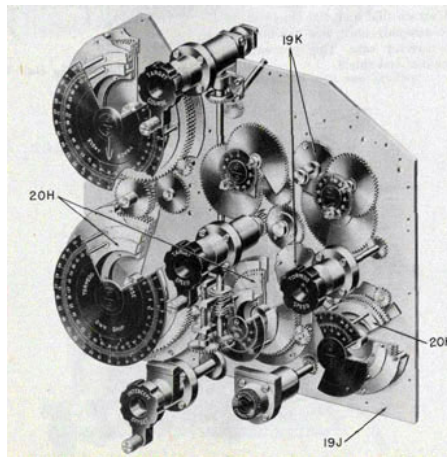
Installing Front Plate, Gear Stops, and Dial Assemblies.
